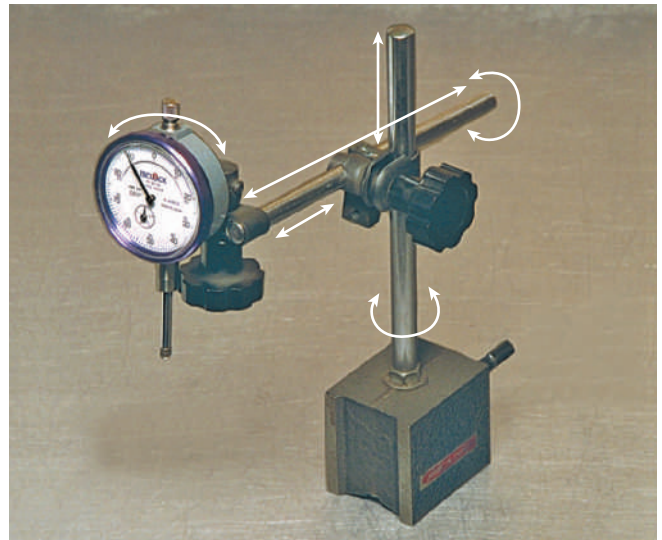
A dial indicator with a highly adaptive holding fixture.
